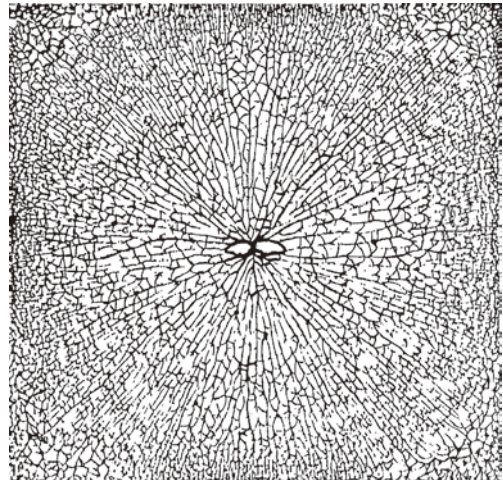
Fracture pattern in tempered glass fractured by punch.
